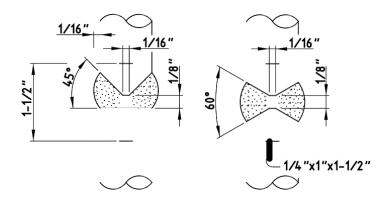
Double Bevel V-Groove Weld in Vertical Position
